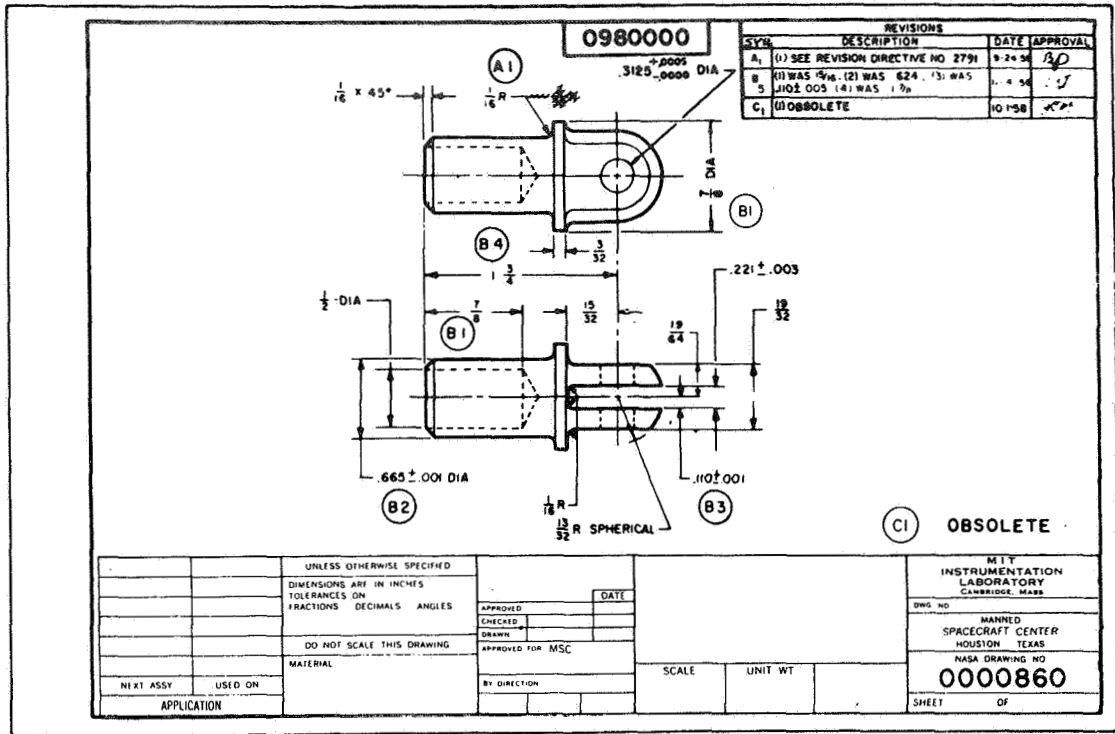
Sample Revision Showing Drawing Obsolete Due to Design Change.
